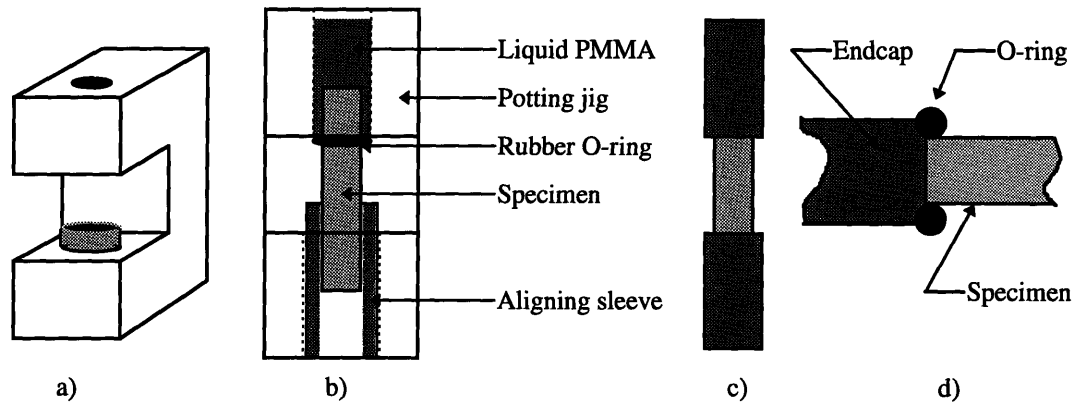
a) Aluminum potting jig with aligning sleeve; b) configuration for molding PMMA endcaps around a specimen; c) a specimen with endcaps after potting is complete; d) A rubber O-ring moulded a rounded fillet at the specimen-endcap interface.
